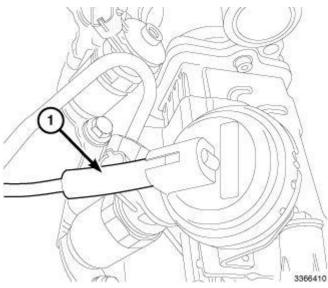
EGR Cooler Vacuum Bypass Hose Courtesy of CHRYSLER GROUP, LLC
